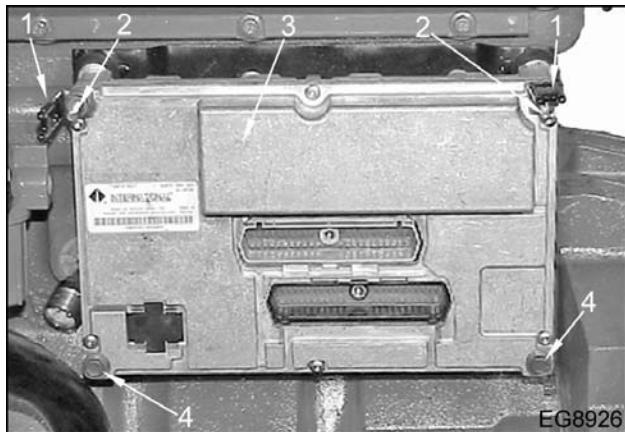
ECM mounting bolts, brackets, and connector (rear mount ECM)
